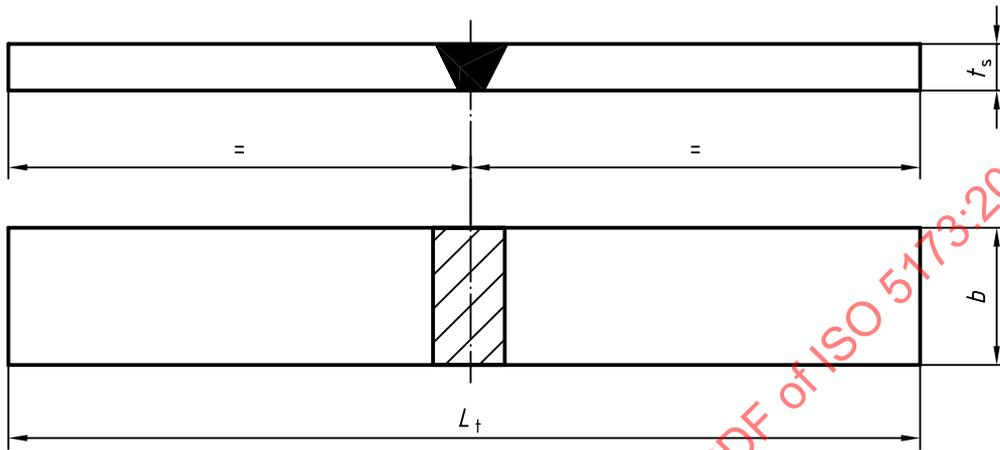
Transverse root and face bend test specimen for a butt weld (RBB and FBB)
